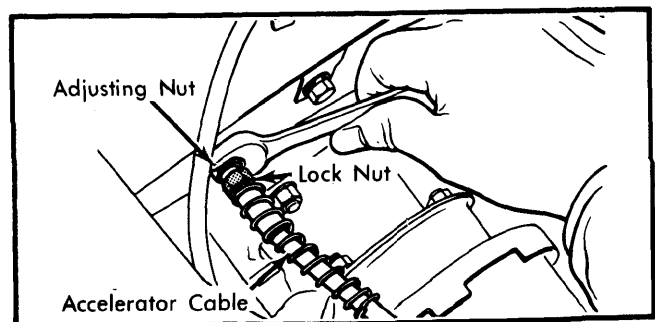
Adjusting Accelerator Cable Free Play (Champ & Colt)
